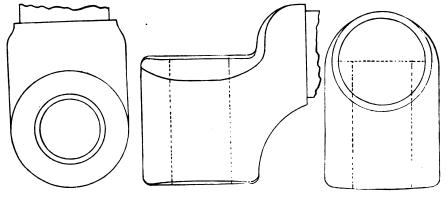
FOUR THOUSAND OF THESE PIECES ARE PRODUCED FROM ONE SET OF DIES BEFORE RESINKING
